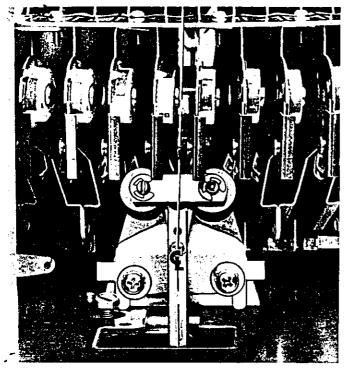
CENTER LINE FOR BACK STOP PAWL SETTING
